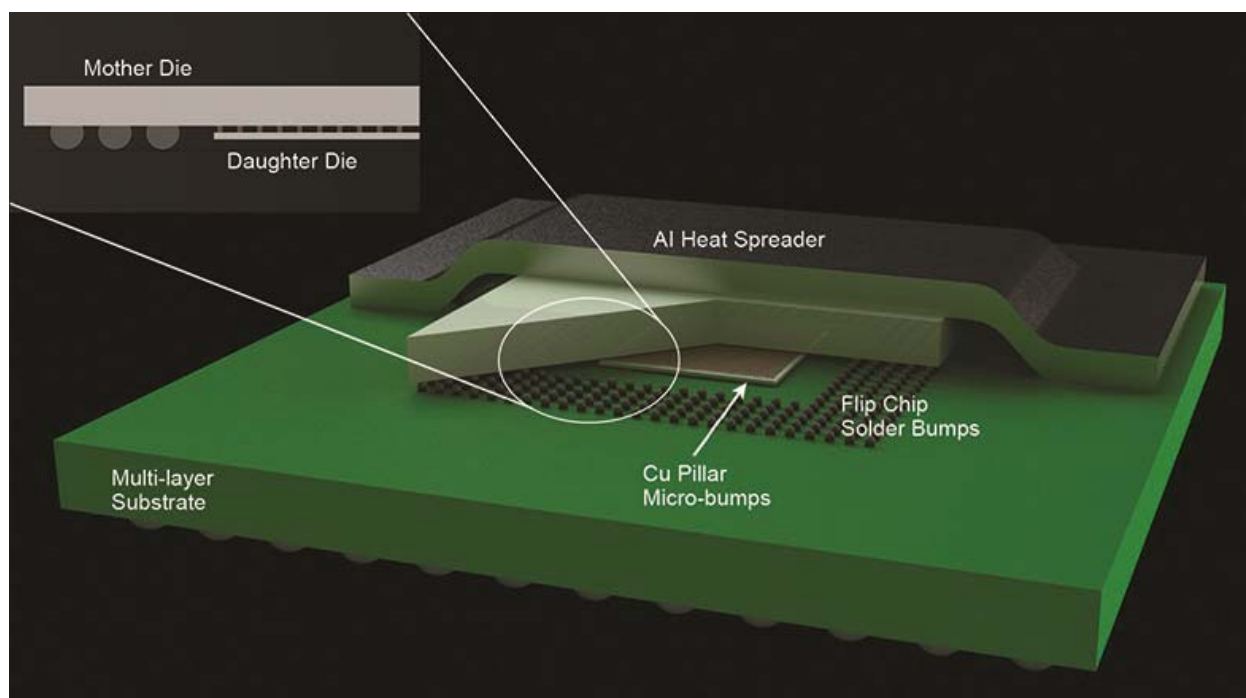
Conceptual illustration of a POSSUM™ assembly where the daughter die is mounted face-to-face with the larger mother die. The mother die is then flip chip mounted onto a substrate or board.
